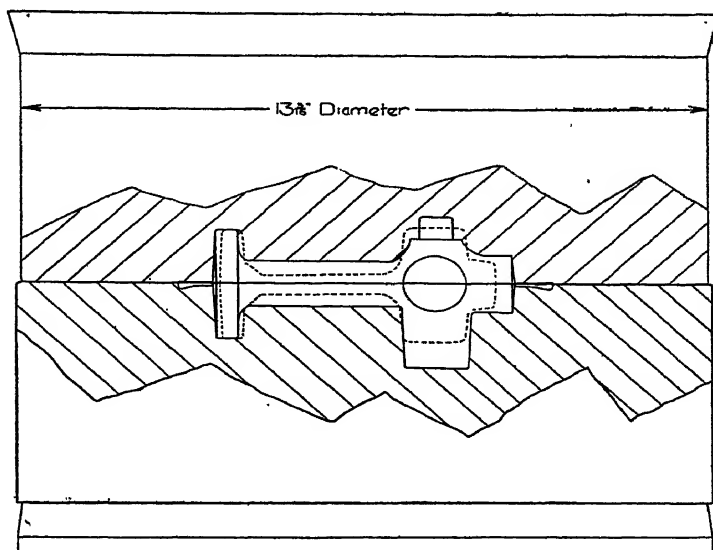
TWO-PIECE DIE FOR PRESSING BRASS VALVE BODY SHOWN IN FIG. 8, ILLUSTRATING USE OF EXTRUDED SHAPE INDICATED BY DOTTED LINES.
